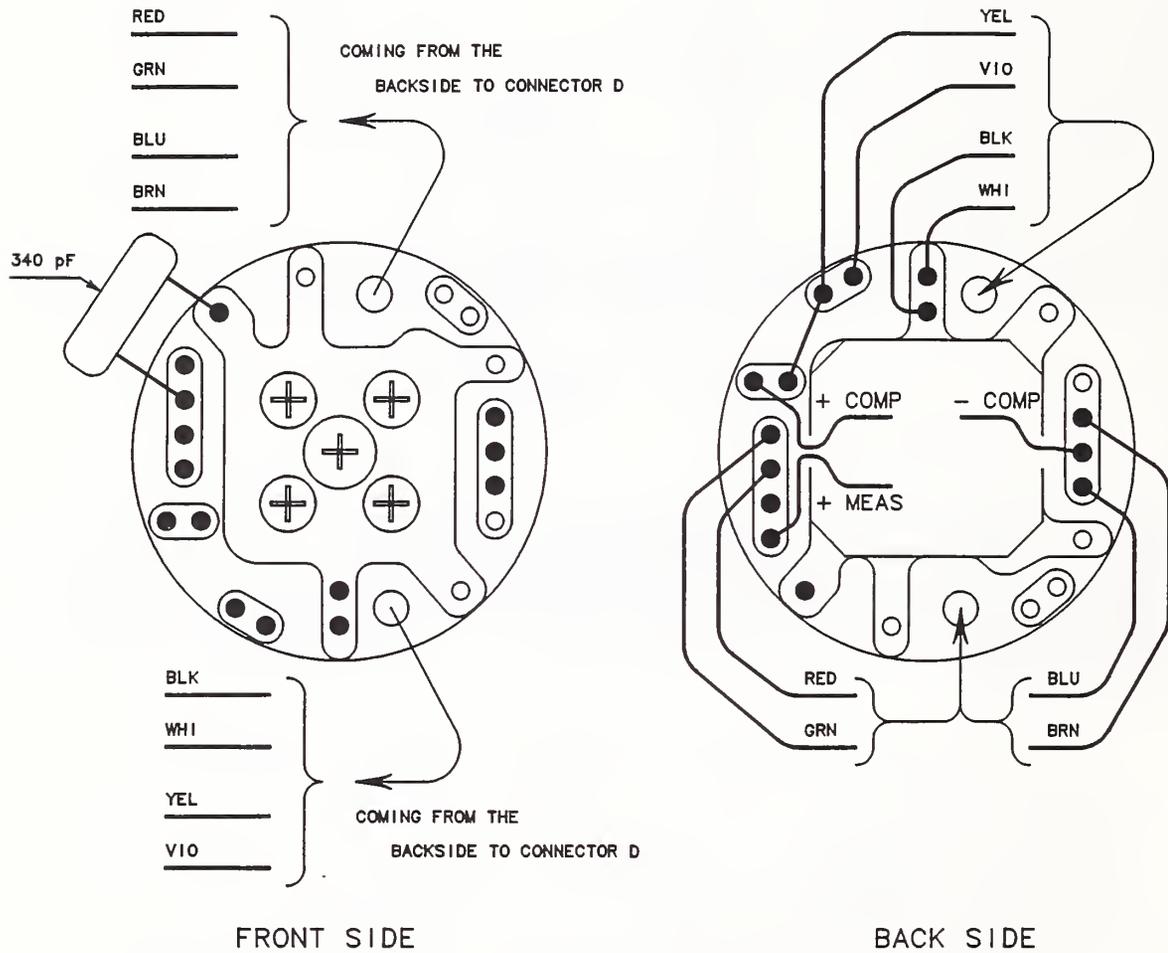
HP 8478B thermistor mount pc board layout with modified wiring.
